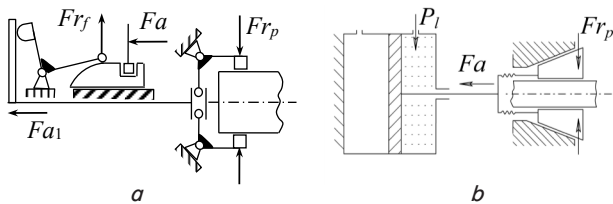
Operating diagrams of typical automatic clamping mechanisms containing: a – form-closure mechanical drive and lever clamping chuck; b – hydraulic drive with powering retention of the position of the output link and collet clamping chuck
